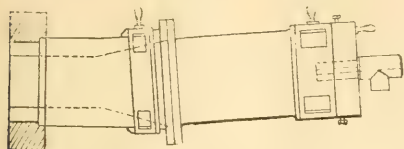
ALTENHEIN BURNER FOR WATER-TUBE BOILER.
